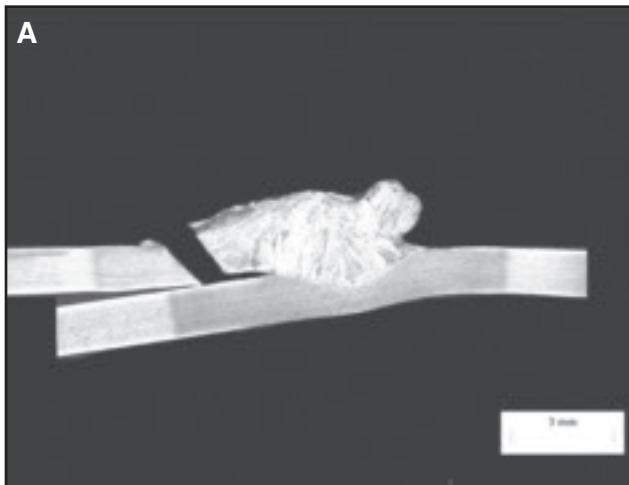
Fracture appearance of TRIP 780 low cooling rate lap joint produced with the ER100S-G wire. (Failure is along the weld interface of the top sheet.)
